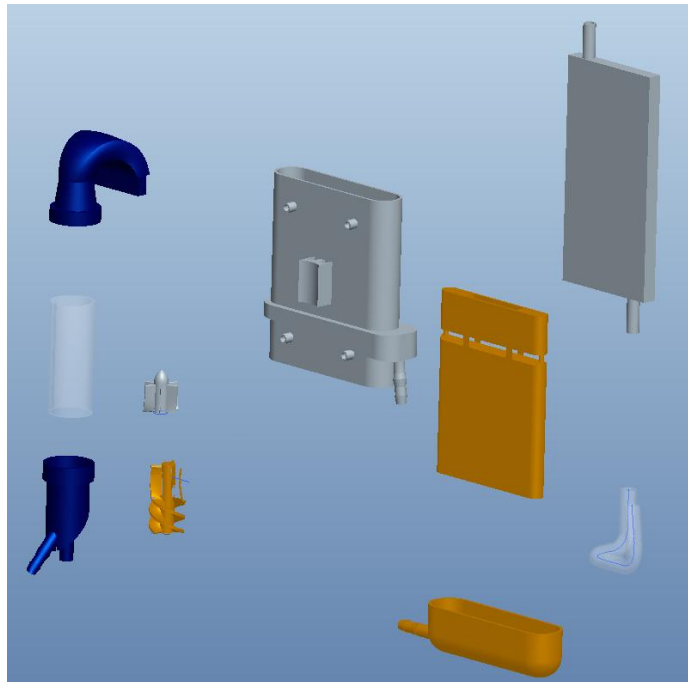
ProEngineer drawing showing the assembled and integrated components of the miniaturized and integrated device in an exploded view.
